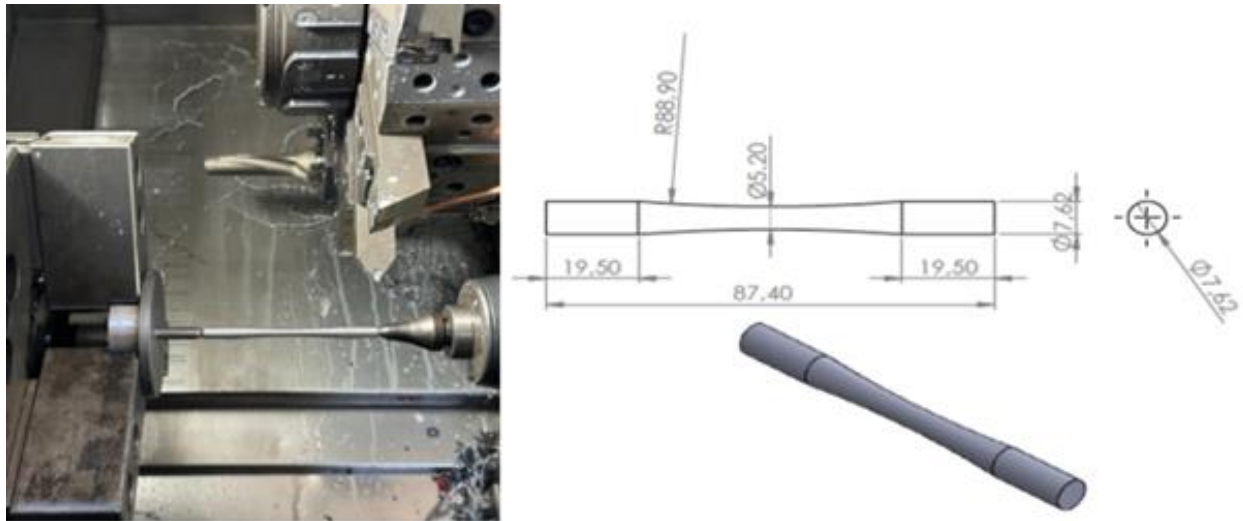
Fatigue test sample dimensions and processing on CNC lathe (ASTM, 2013).
